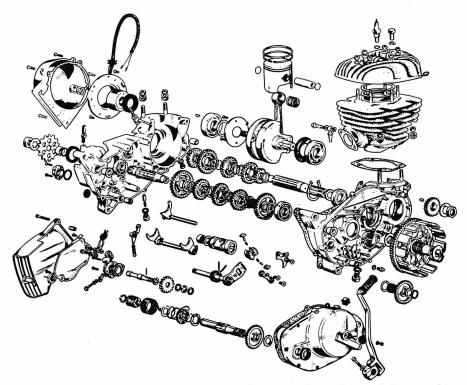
Exploded view of Suzuki TM400R Cyclone engine and transmission assembly.
